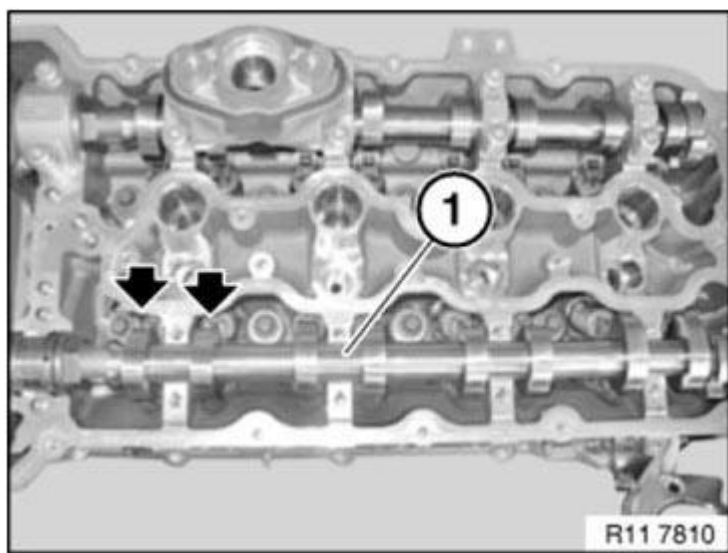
Positioning Inlet Camshaft So That Cams Point To Side At Cylinder 5
